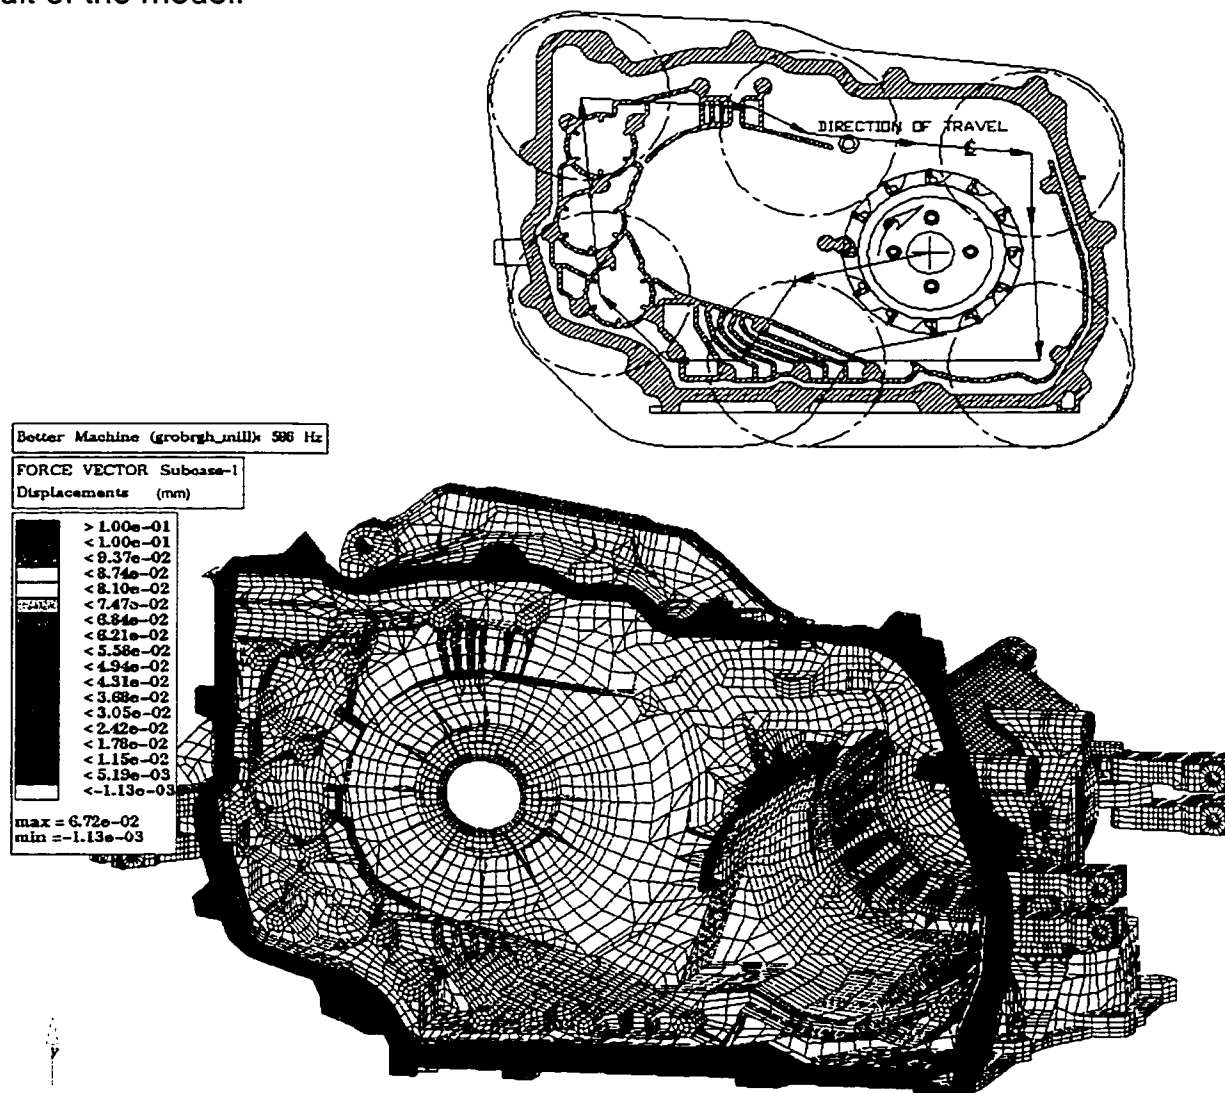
FEA Model of Right Hand Cutter Rotation and Tool Path [6]
